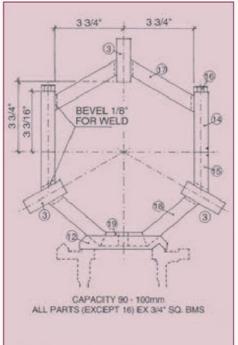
and Photo 2 show the smaller fixed steady. All the frame parts are from 0.75in. square B.M.S, arc welded. Two "feet" Parts 12, sit on the lathe bedways and locate the steady securely. The frame is split at the level of the lathe spindle: the side members, Parts 5 and 6, are joined by the bolt, Part 7. I considered the usual hinged design, but the design shown is simpler to make, is very rigid' and meets my requirements. All the joints are welded all round: for clarity I have not shown the welds in Fig. 1. For the welds on the front and rear faces I bevelled one side of the joints as indicated on Fig. 1. Parts 3,5 and 6 require to be centred in a four-jaw chuck for machining. if the material is really square, it is a simple matter to chuck a round piece of the same size and set that
